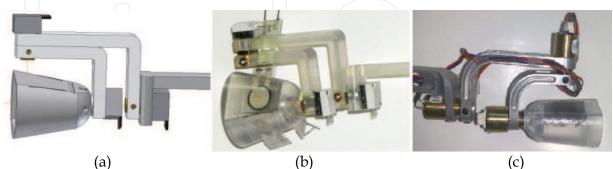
Lateral and frontal view of thimble and sensors: a). CAD. (b). Resine prototype. (c)Aluminium prototype
